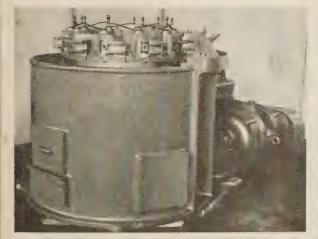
Rotary, Continuous Surface-Broaching Machine
